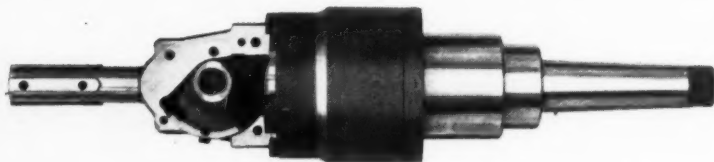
Single-point Tool for Rough-boring Spherical Seat
